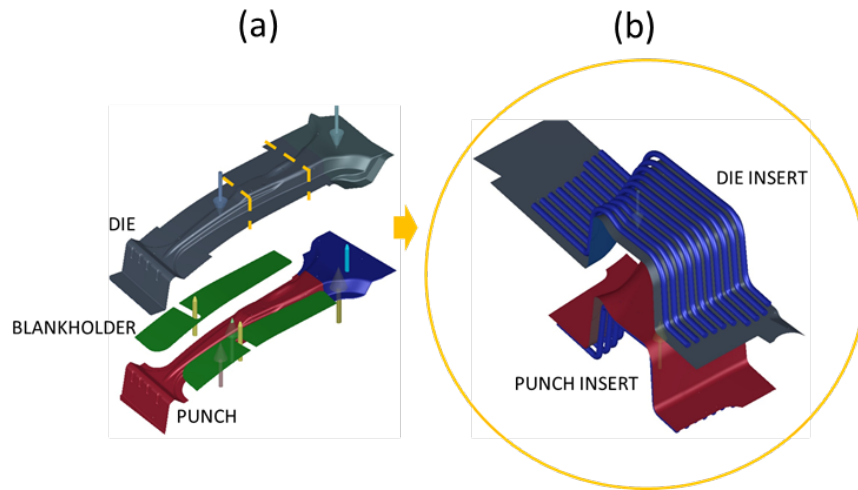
Tools of investigated B-Pillar (a) and detail of tool insert (b)
